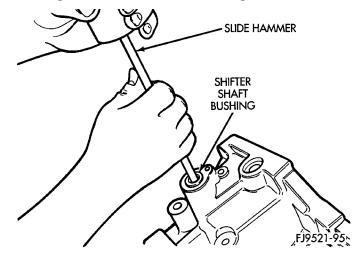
Crossover Shaft Bushing Removal INSTALLATION
